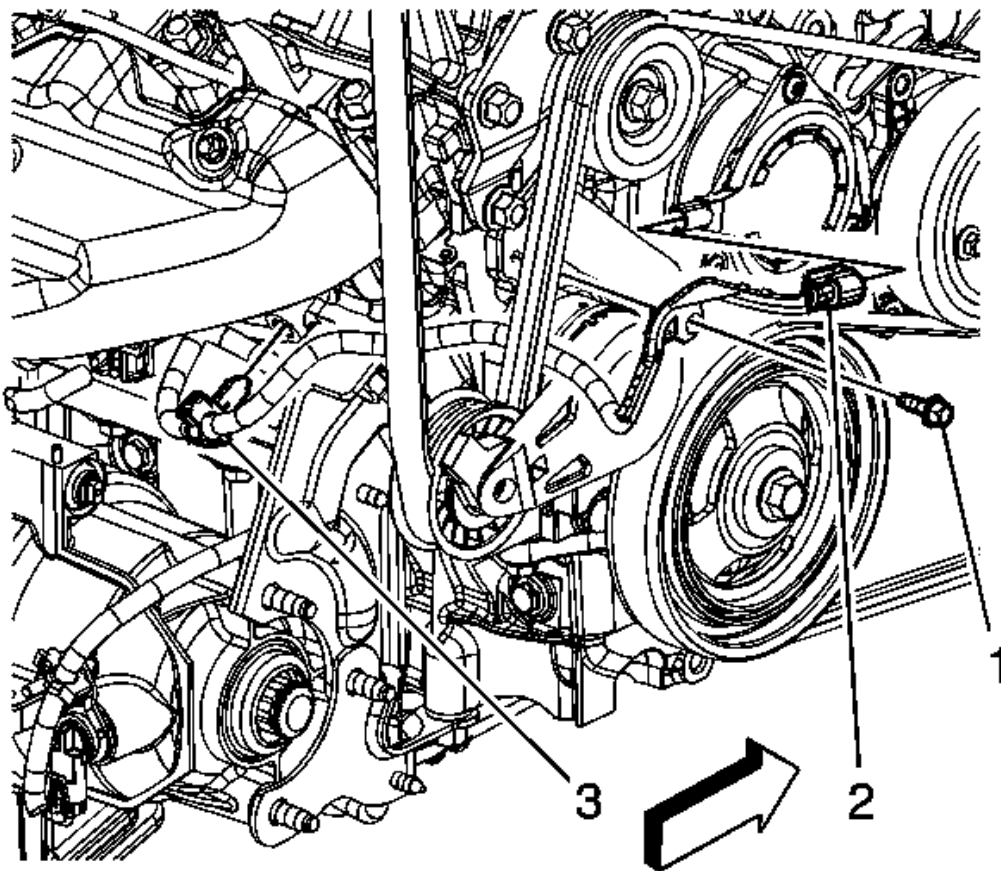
View Of Engine Wiring Harness Electrical Connector
